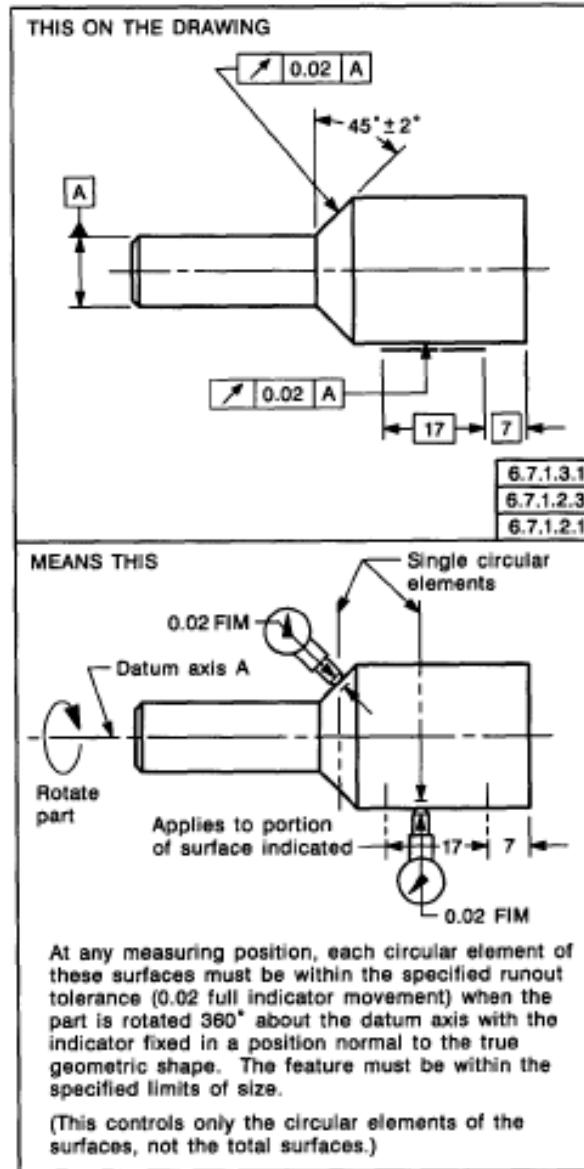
SPECIFYING CIRCULAR RUNOUT RELATIVE TO A DATUM DIAMETER
